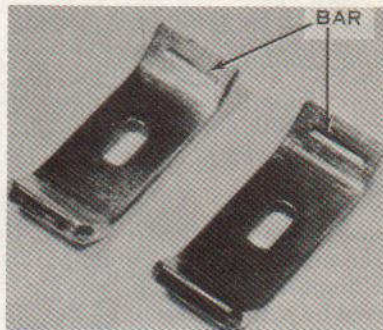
Bar is stamped across end of starter pawls which should be sharp.
